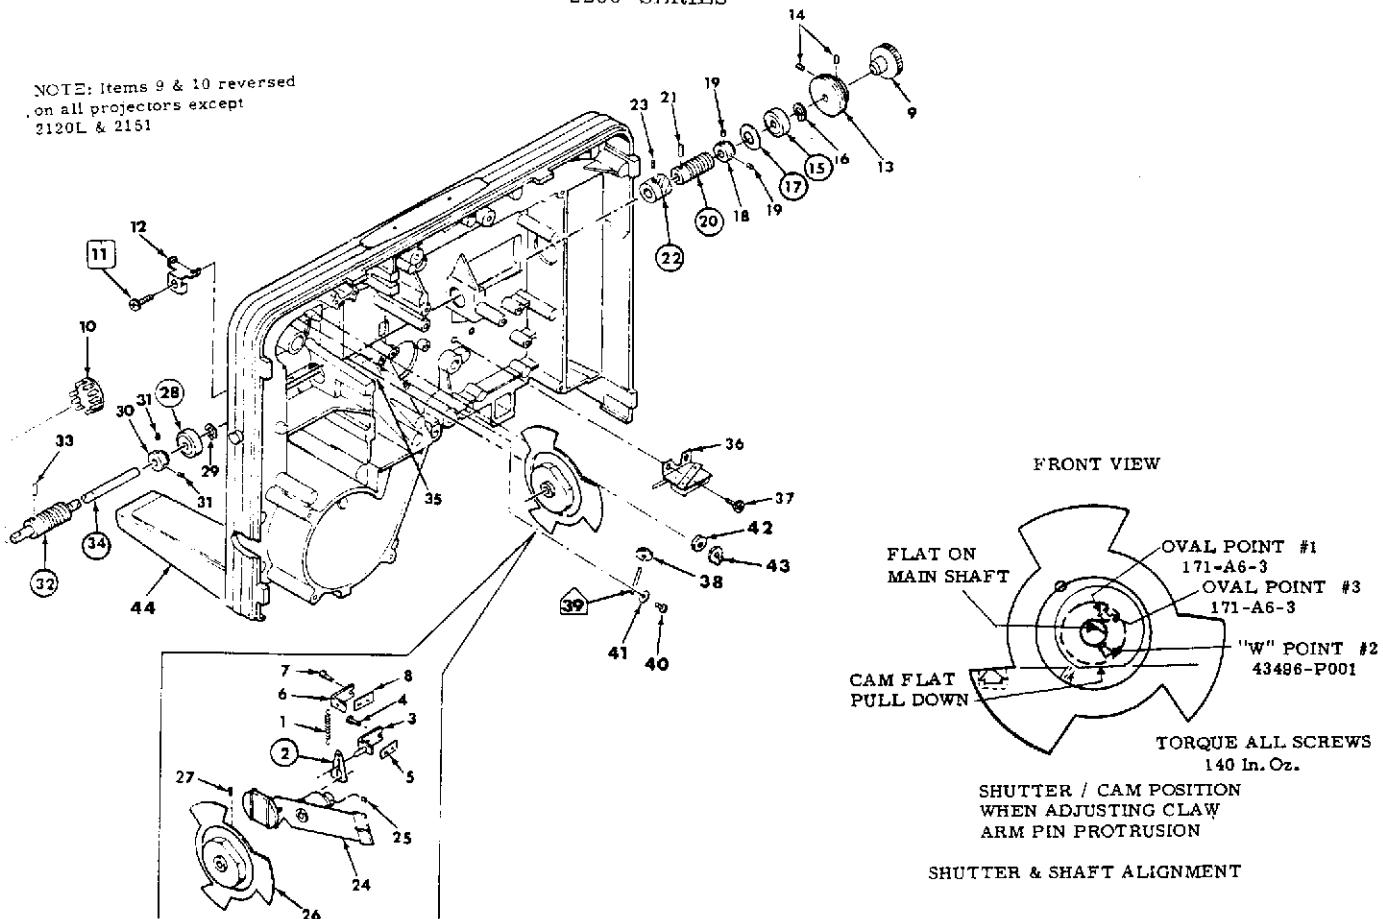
REMOVAL AND REASSEMBLY OF MAIN SHAFT
